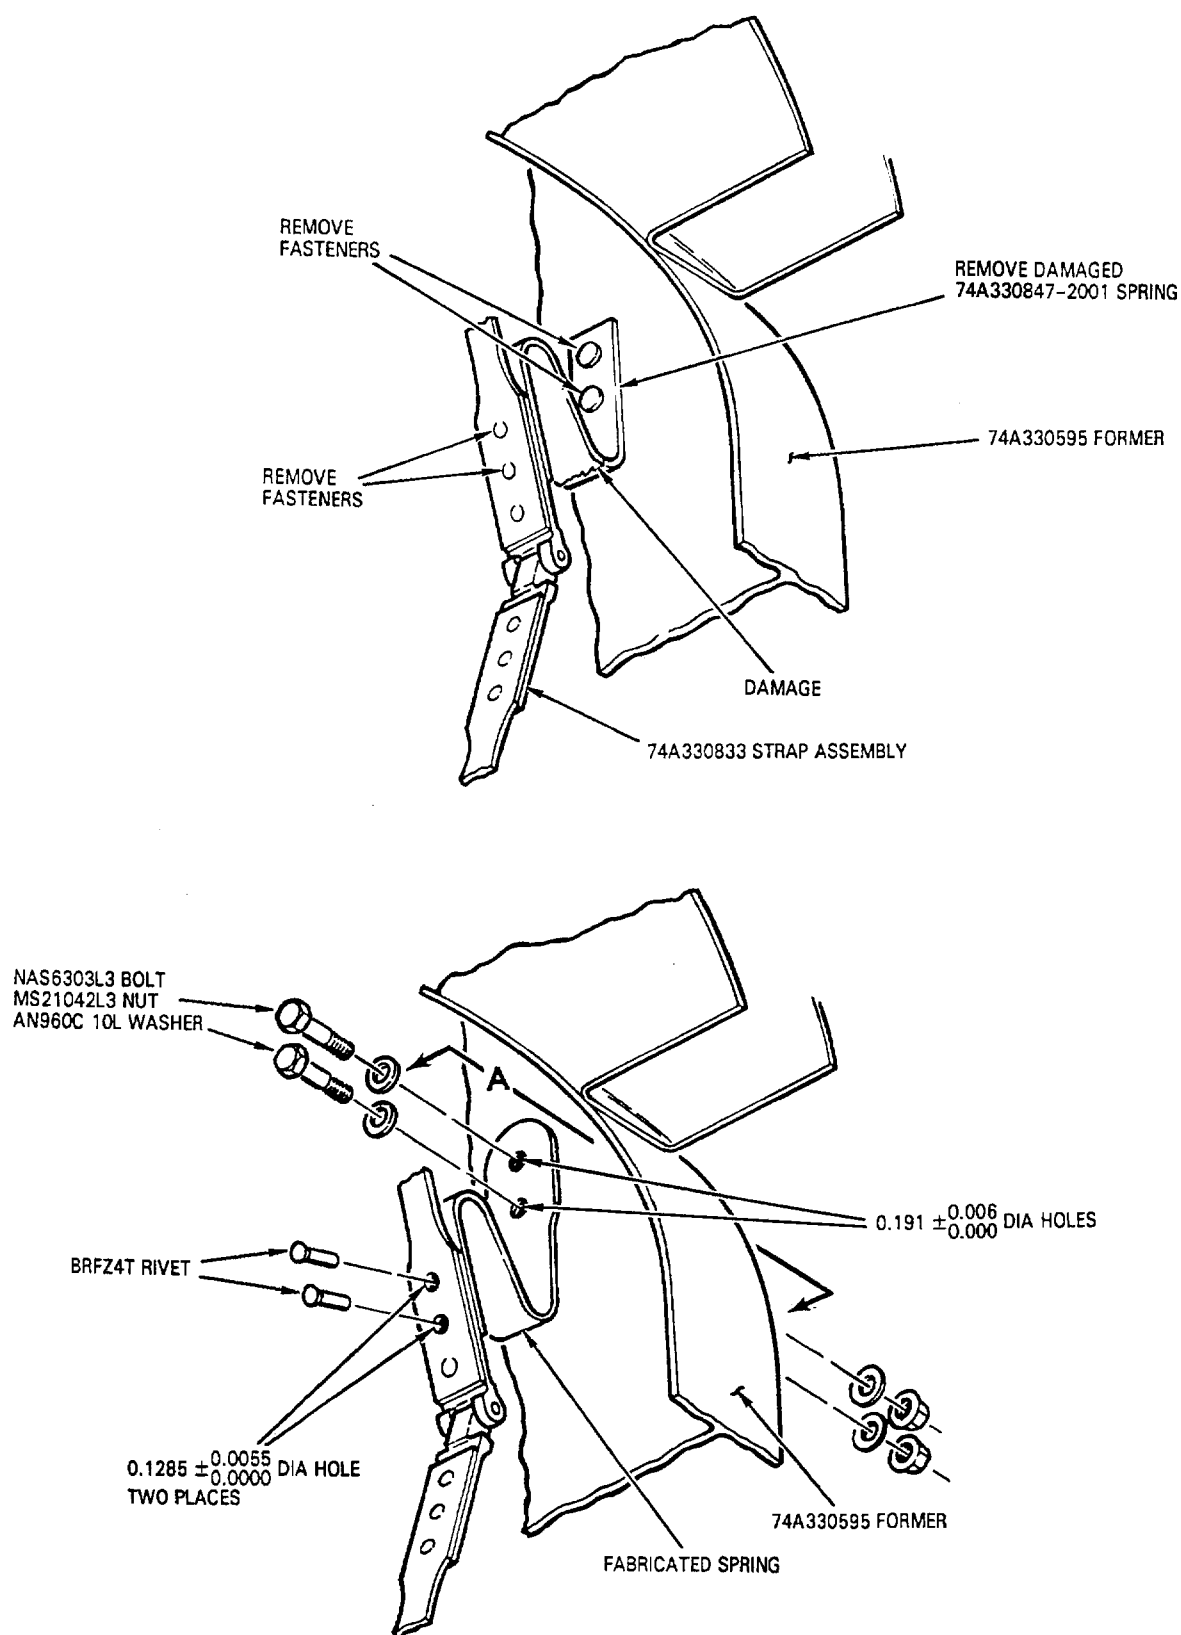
Repair 74A330847-2001 Spring (Sheet 1)
